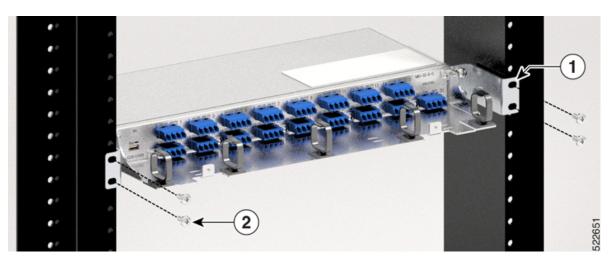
Installing the Mounting Bracket on a 23-inch Rack
